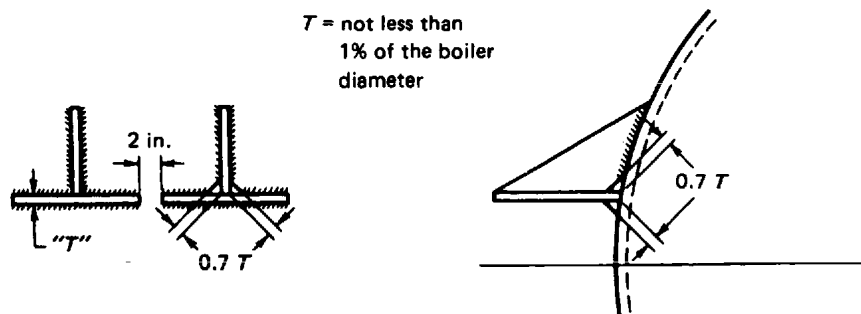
(a) SPACING AND WELD DETAILS FOR SUPPORTING LUGS IN PAIRS ON HORIZONTAL-RETURN TUBULAR BOILER
